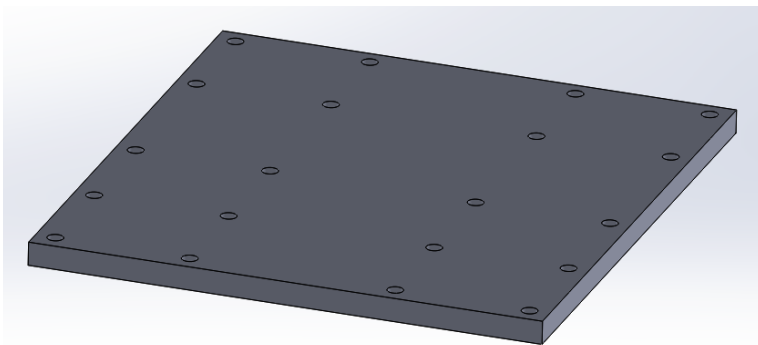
This is the chassis attached to the top of Fig5 part. Other components such as stepper motor, the base for the Y-axis are attached to this chassis.
